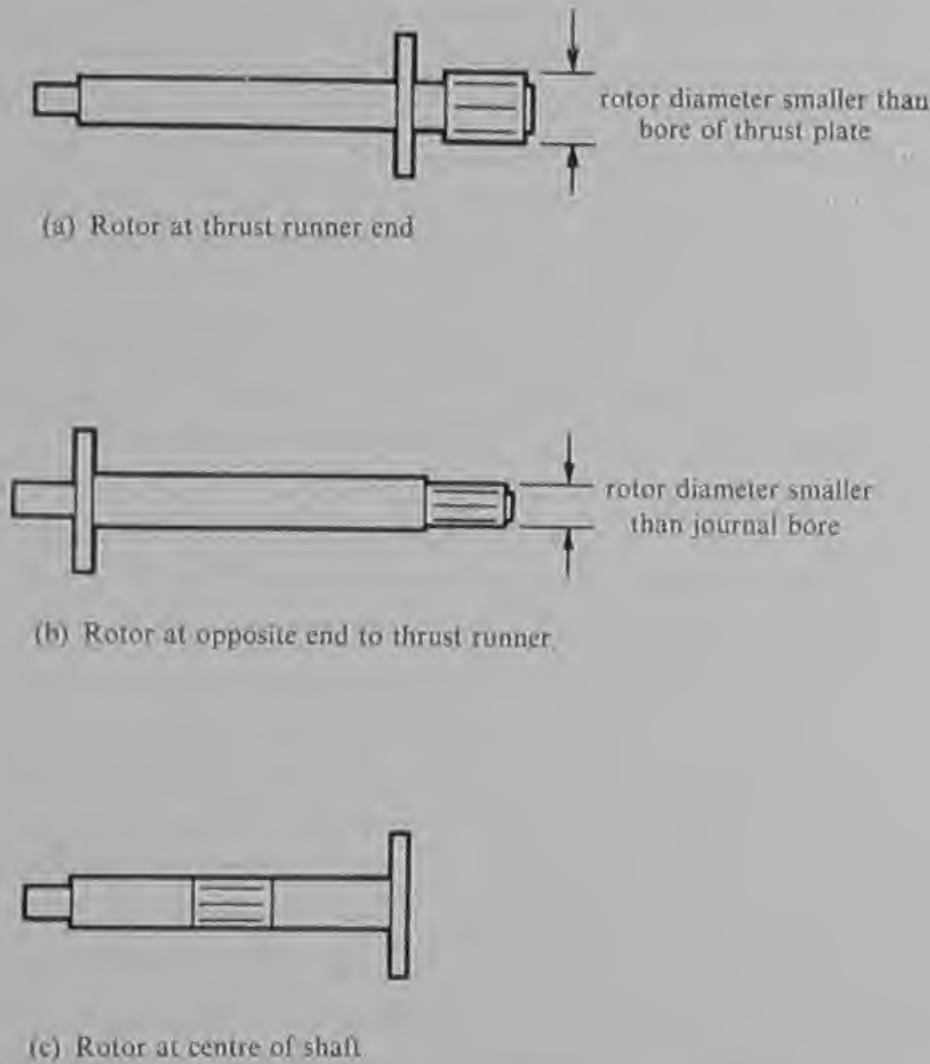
High frequency motors—alternative rotor arrangements employing the bearing configuration shown in Fig. 6.2(c)
